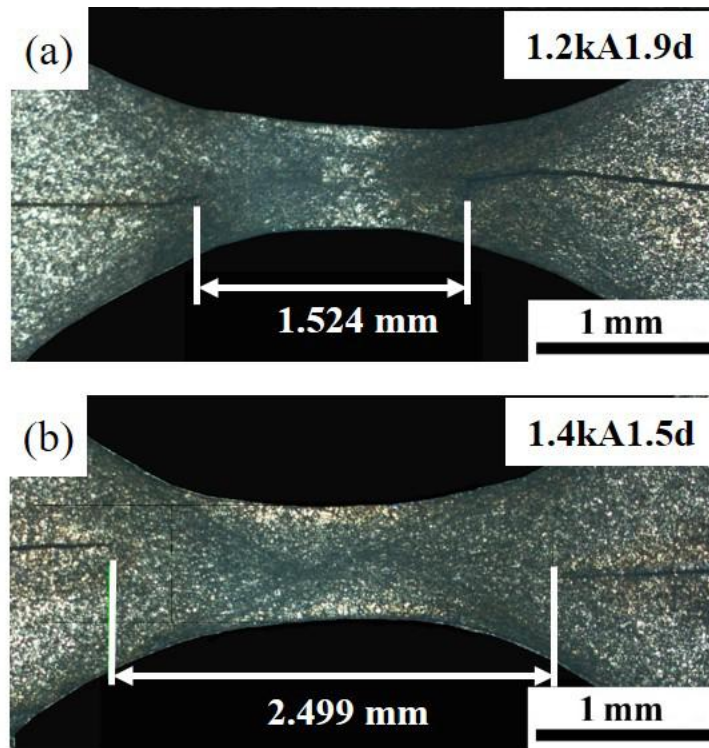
Cross-sectional macrographs of (a) 1.2kA1.9d and (b) 1.4kA1.5d joints.
